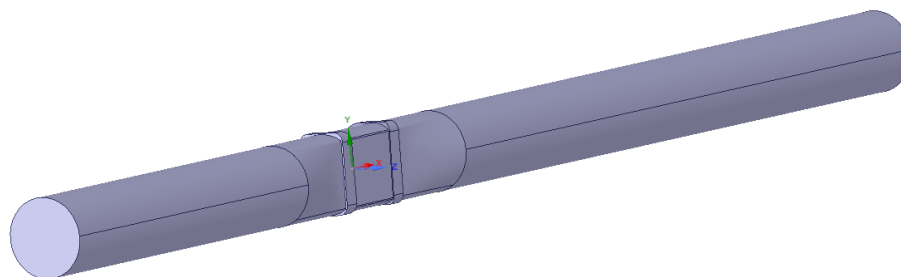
Internal Flow Passage of the 3D Plug Valve Model
